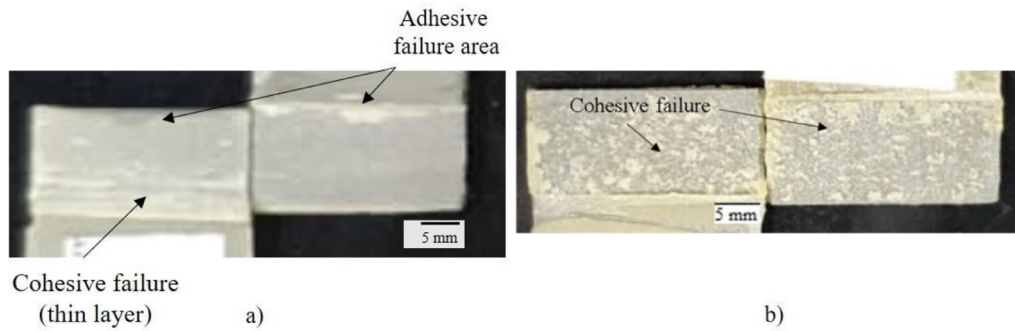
Representative fracture surfaces of (a) P 110 and (b) E LTX adhesives treated with BA.
